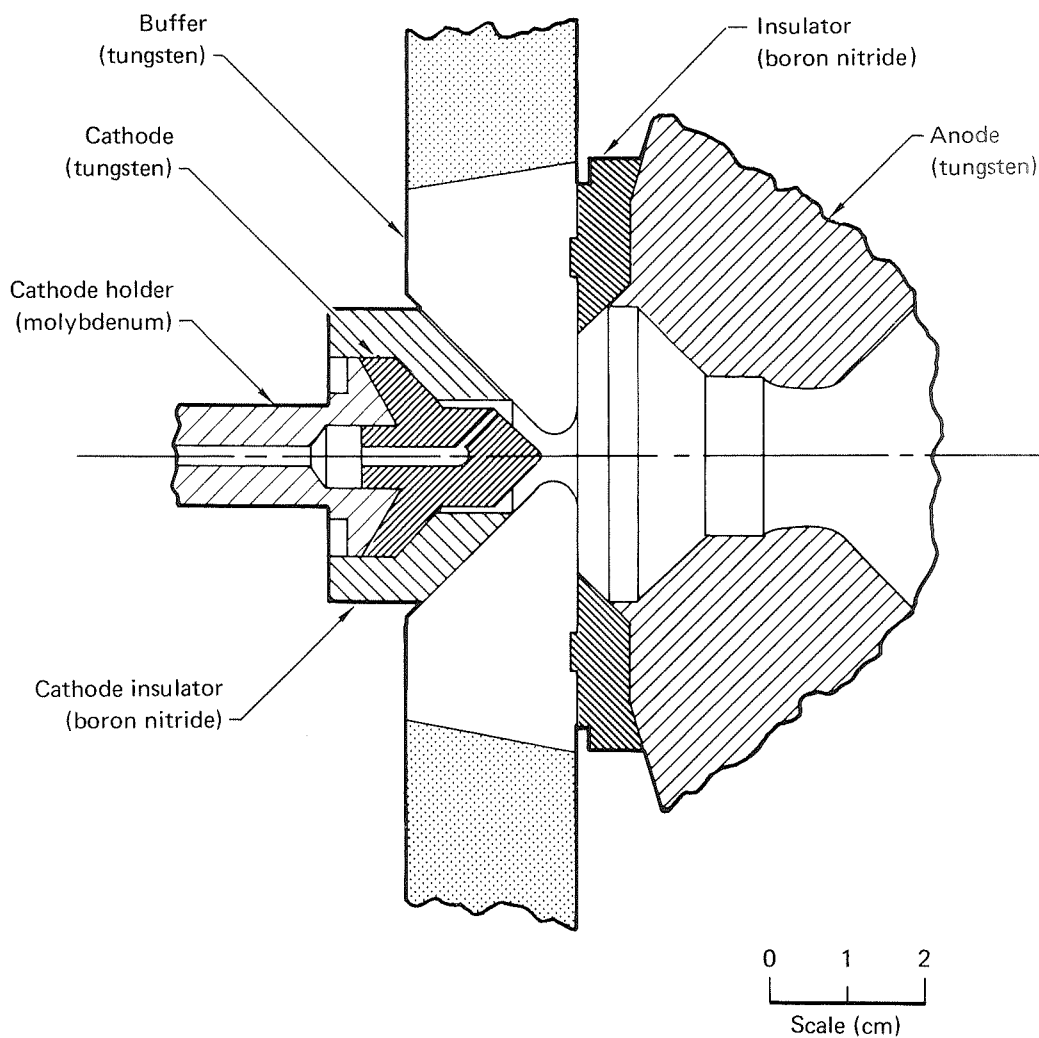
MDC X-8 thruster cathode-insulator assembly (solid conical cathode and buffer)
